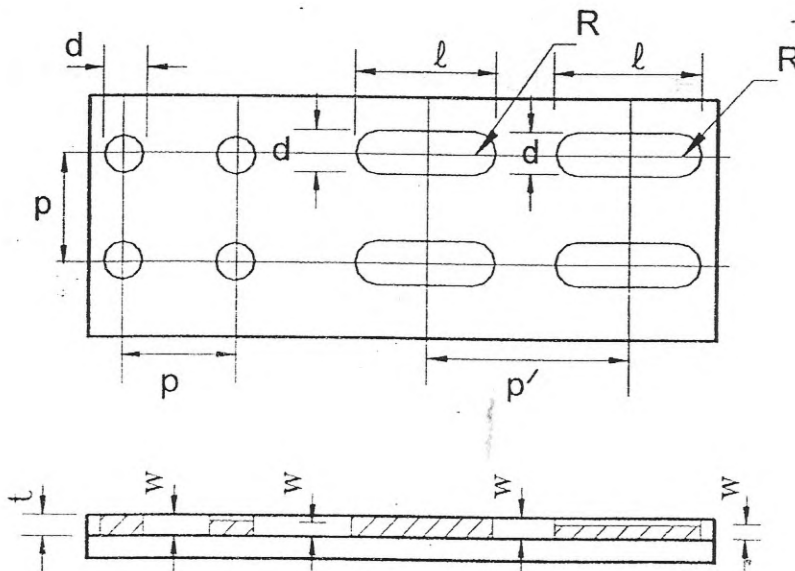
Definitions of Plug and Slot Welds
